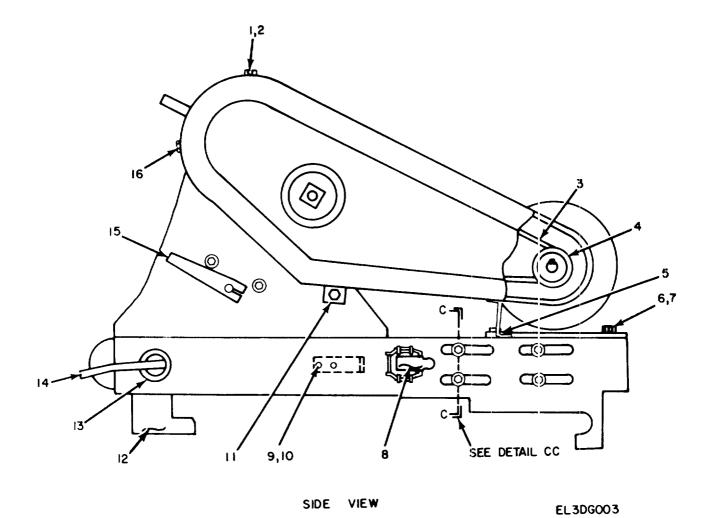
Reeling Machines, Cable, Motor Driven RL-172/G and RL-172A/G (Sheet 1 of 3).
